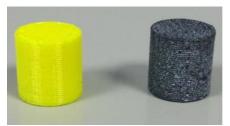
(a) Unpainted Specimen (b) Painted specimen
